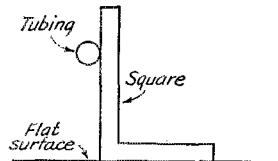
Marking line for spotting holes to be drilled in tubing or rod.
